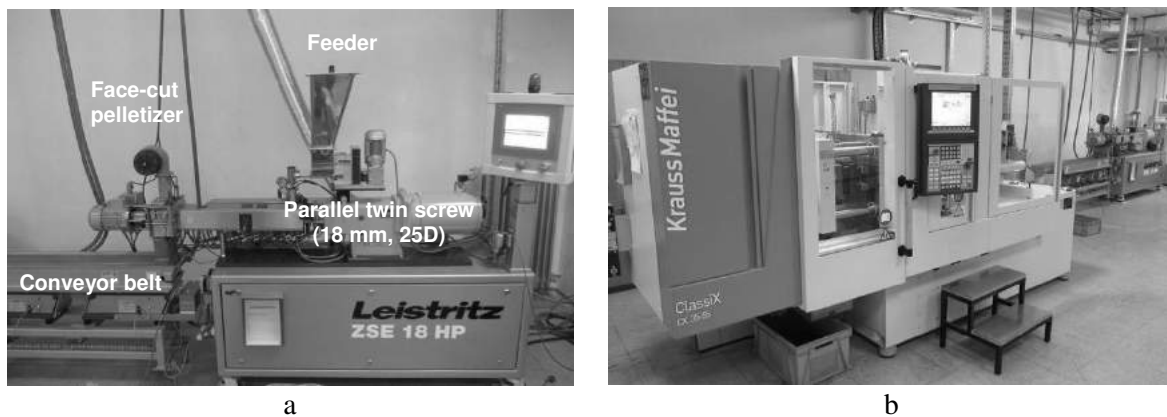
Co-rotating twin-screw extruder (a) for compounding of polymer bonded magnets and injection moulding machine for net-shape moulding of final magnetic products (b)
